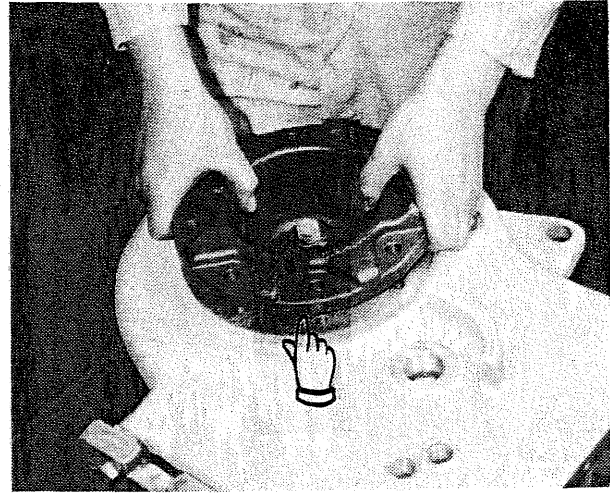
Drum Assembly & Installation (5 of 6)
